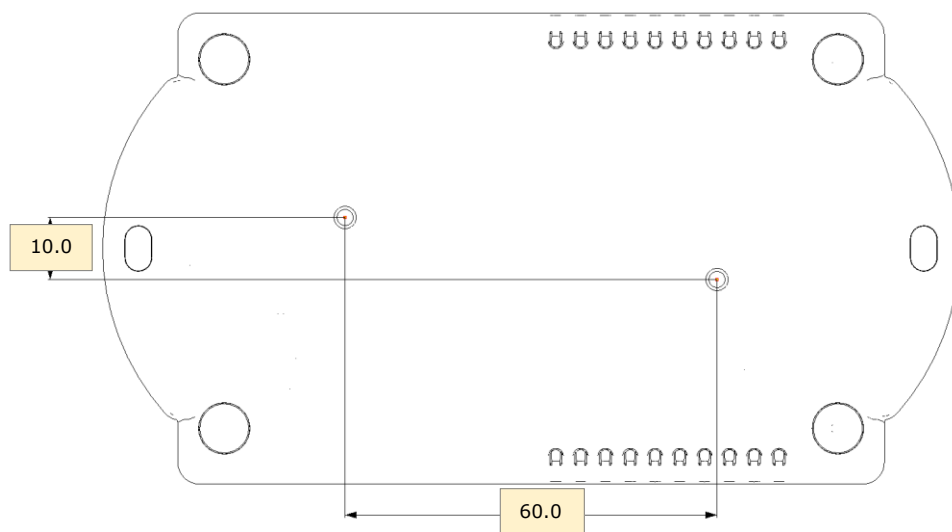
LDSBus Isolated IO Controller Dimension – Bottom View
